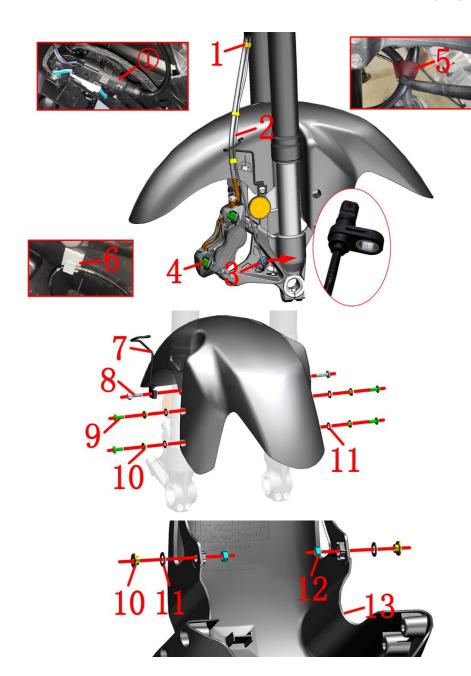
FRONT FORK COMPONENT		Front mudboard component (Aluminum)	CHK	(0)
